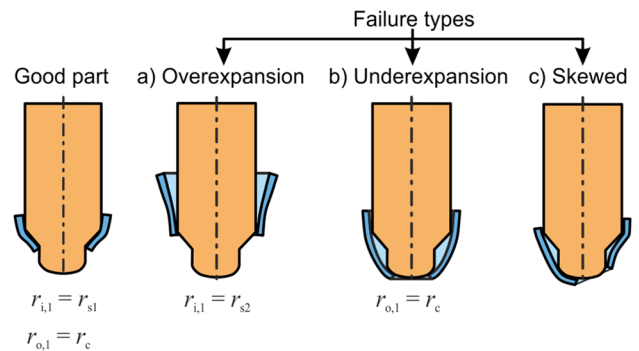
Failure types in pierced-sheet draw-forging
